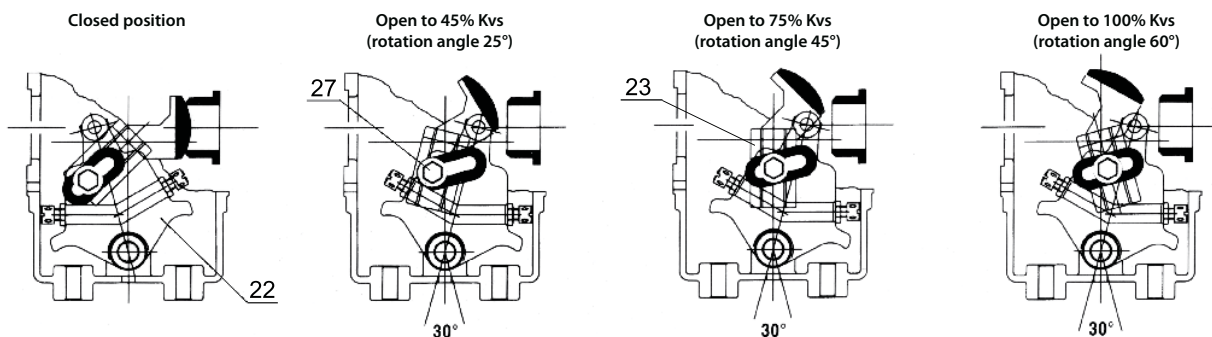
Bearing pin (27) position on lever (22) regarding crankshaft (23) (valve shaft - Kvs) rotation angle.
